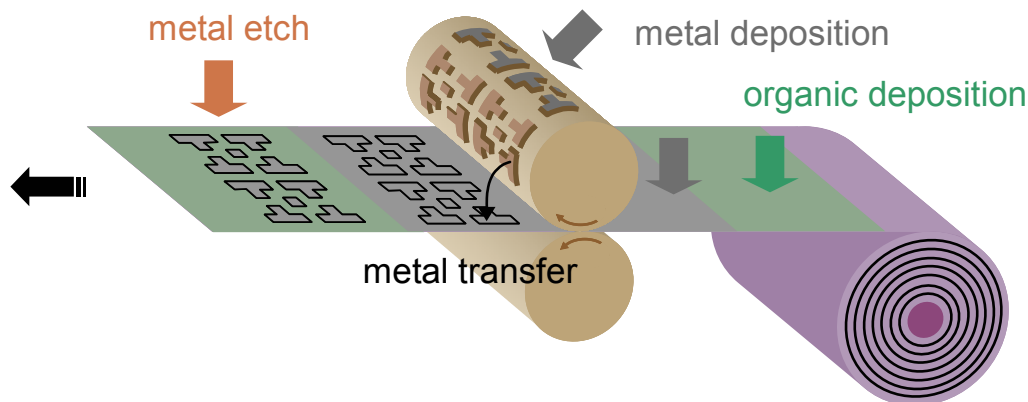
Schematic of a roll-to-roll process employing the additive cold-welding technique for the electrode patterning.[57]
